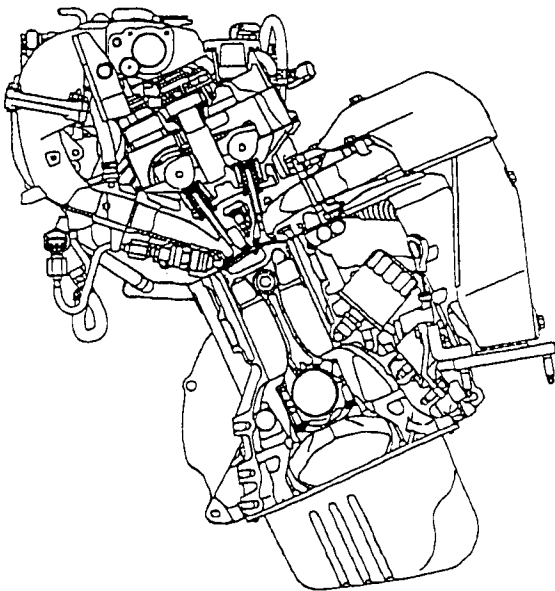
Cutaway view of the Toyota GDI D-4 engine [41].
